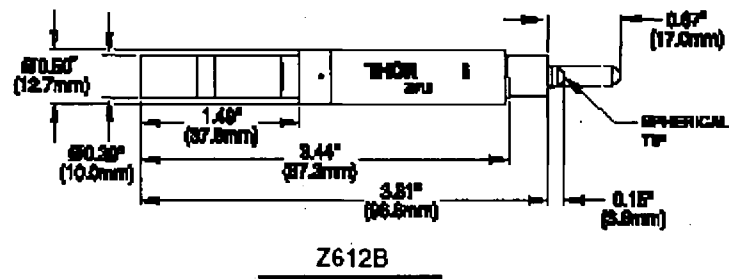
Mechanical drawing of Thorlabs Z612B 12mm Motorized Actuator.
